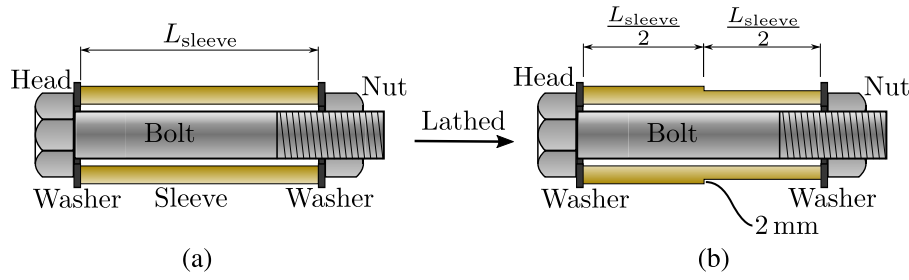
Bolt with sleeve (a) before being put on lathe and (b) after being put on lathe
